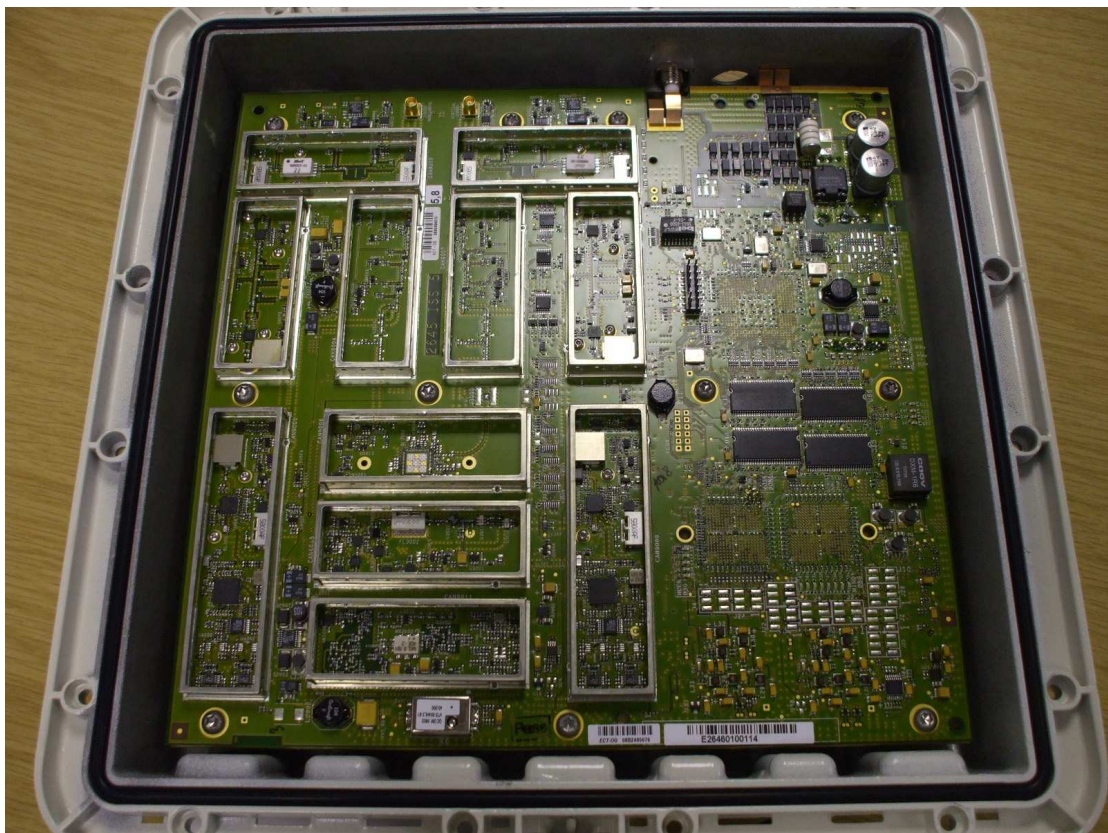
PTP5xx00 with cover plate and screening cans removed to show internal assembly.
